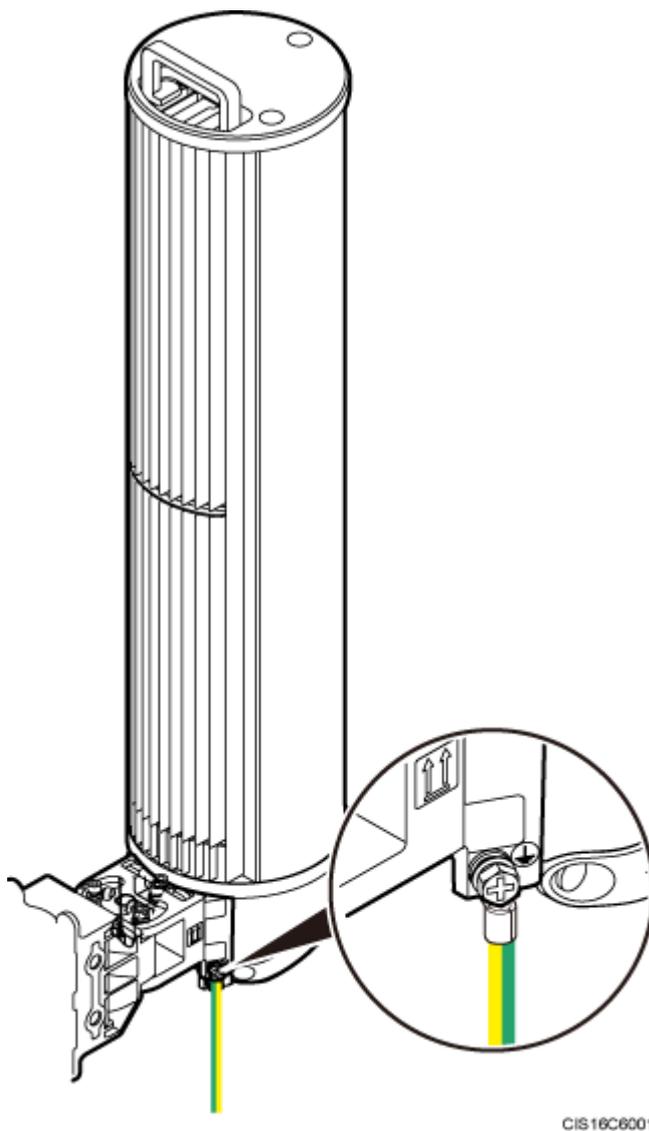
Installing a PGND cable when an AAU is installed on a wall
